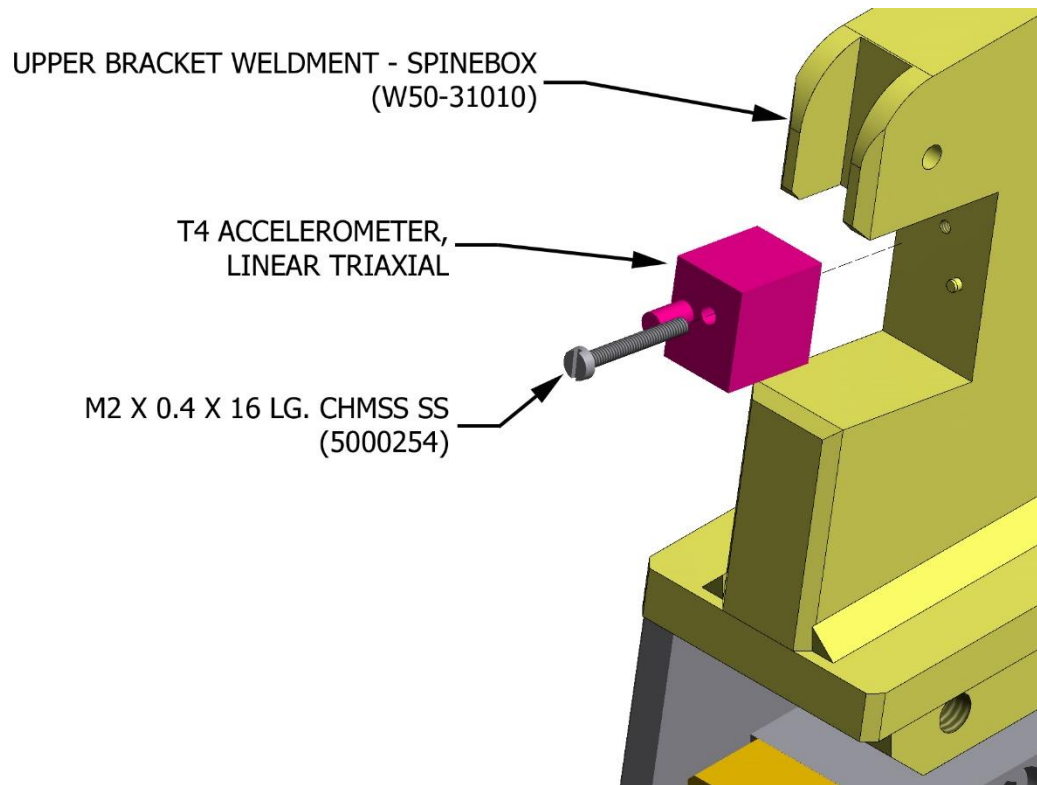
Removing the T4 accelerometer from the top of the spine box weldment.
